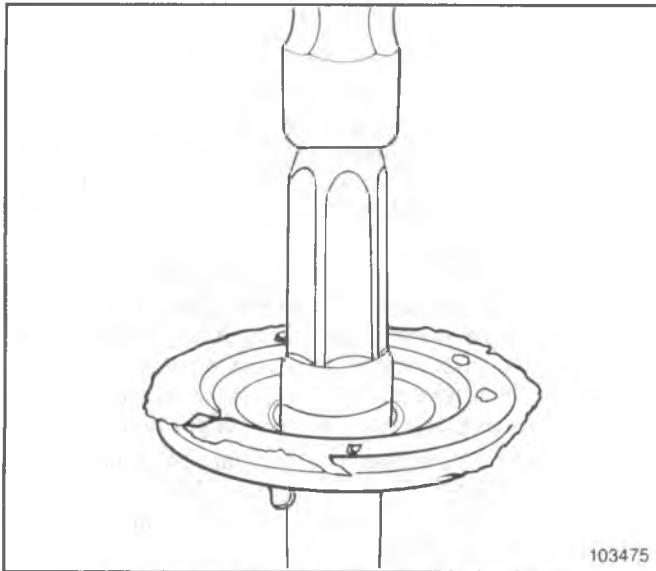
B3-20--Drive Gear Bearing Retainer Seal
